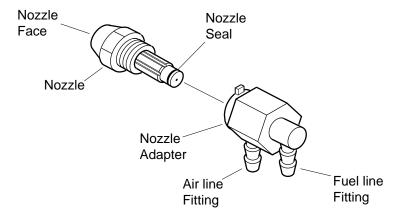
Nozzle and Nozzle Adapter, 8,8 kW (30,000 BTU/Hr) Model
